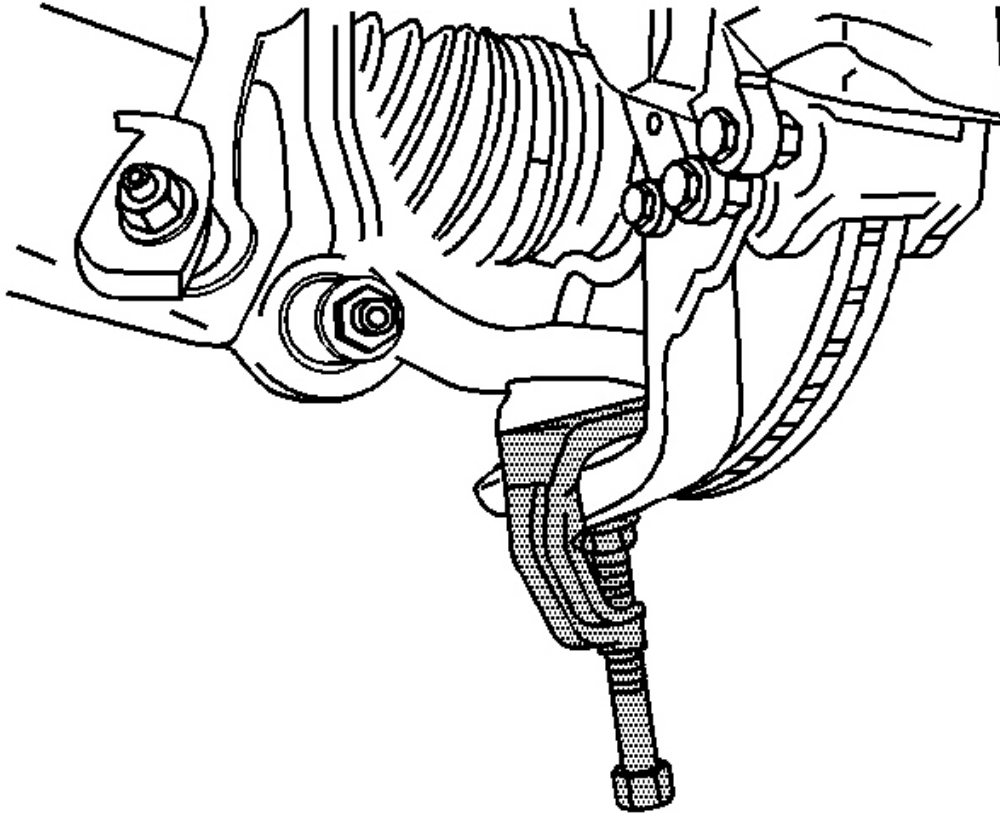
View Of Upper Control Arm To Steering Knuckle Pinch Bolt & Nut
